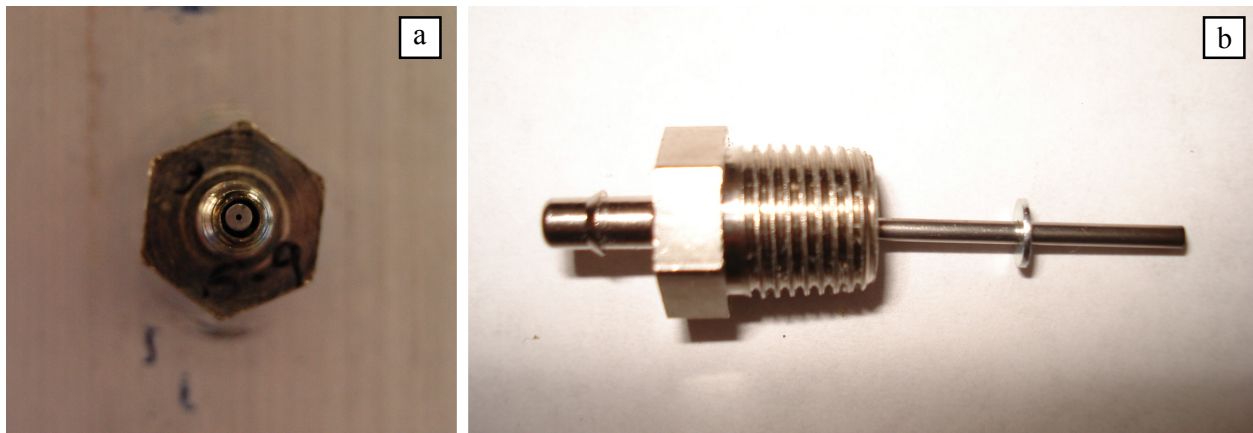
Pressure manifold outlet microtubing. Two photos of one of the pressure manifold tube fittings that serve as the outlets to the water manifold. (a) End view of a fitting installed in the manifold. This view shows the small inner diameter of the microtubes. (b) Side view of a fitting just after gluing in a microtube.
